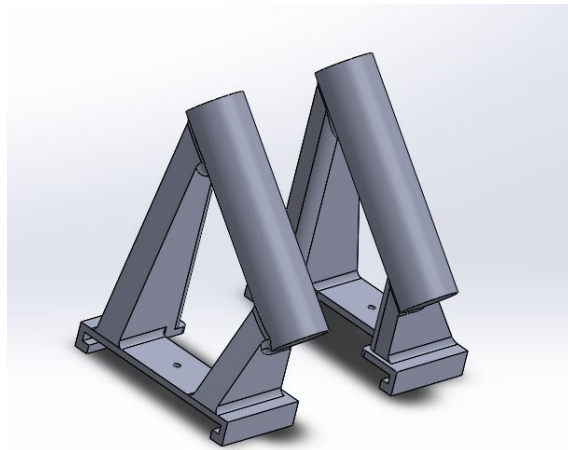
The CAD model of the gripper designed to hold robotic connectors
